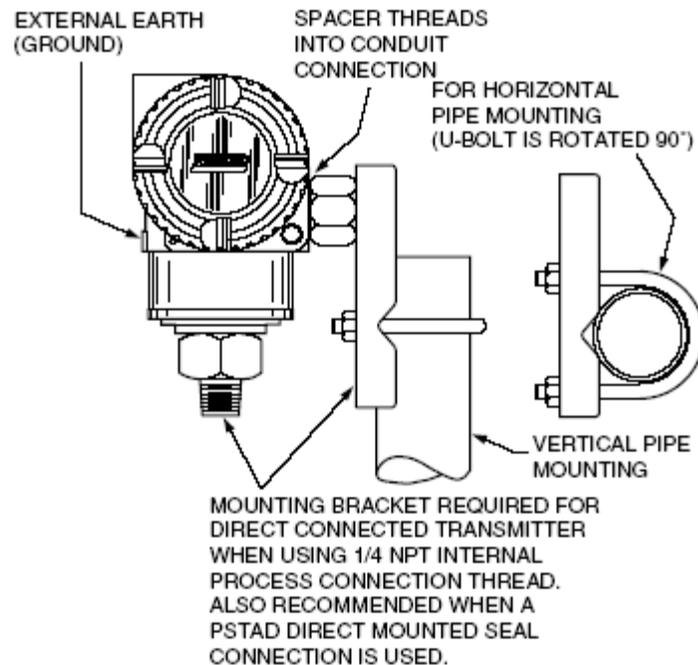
Mounting 4000 transmitter to a Pipe or Surface – 1/2 NPT Mounting
